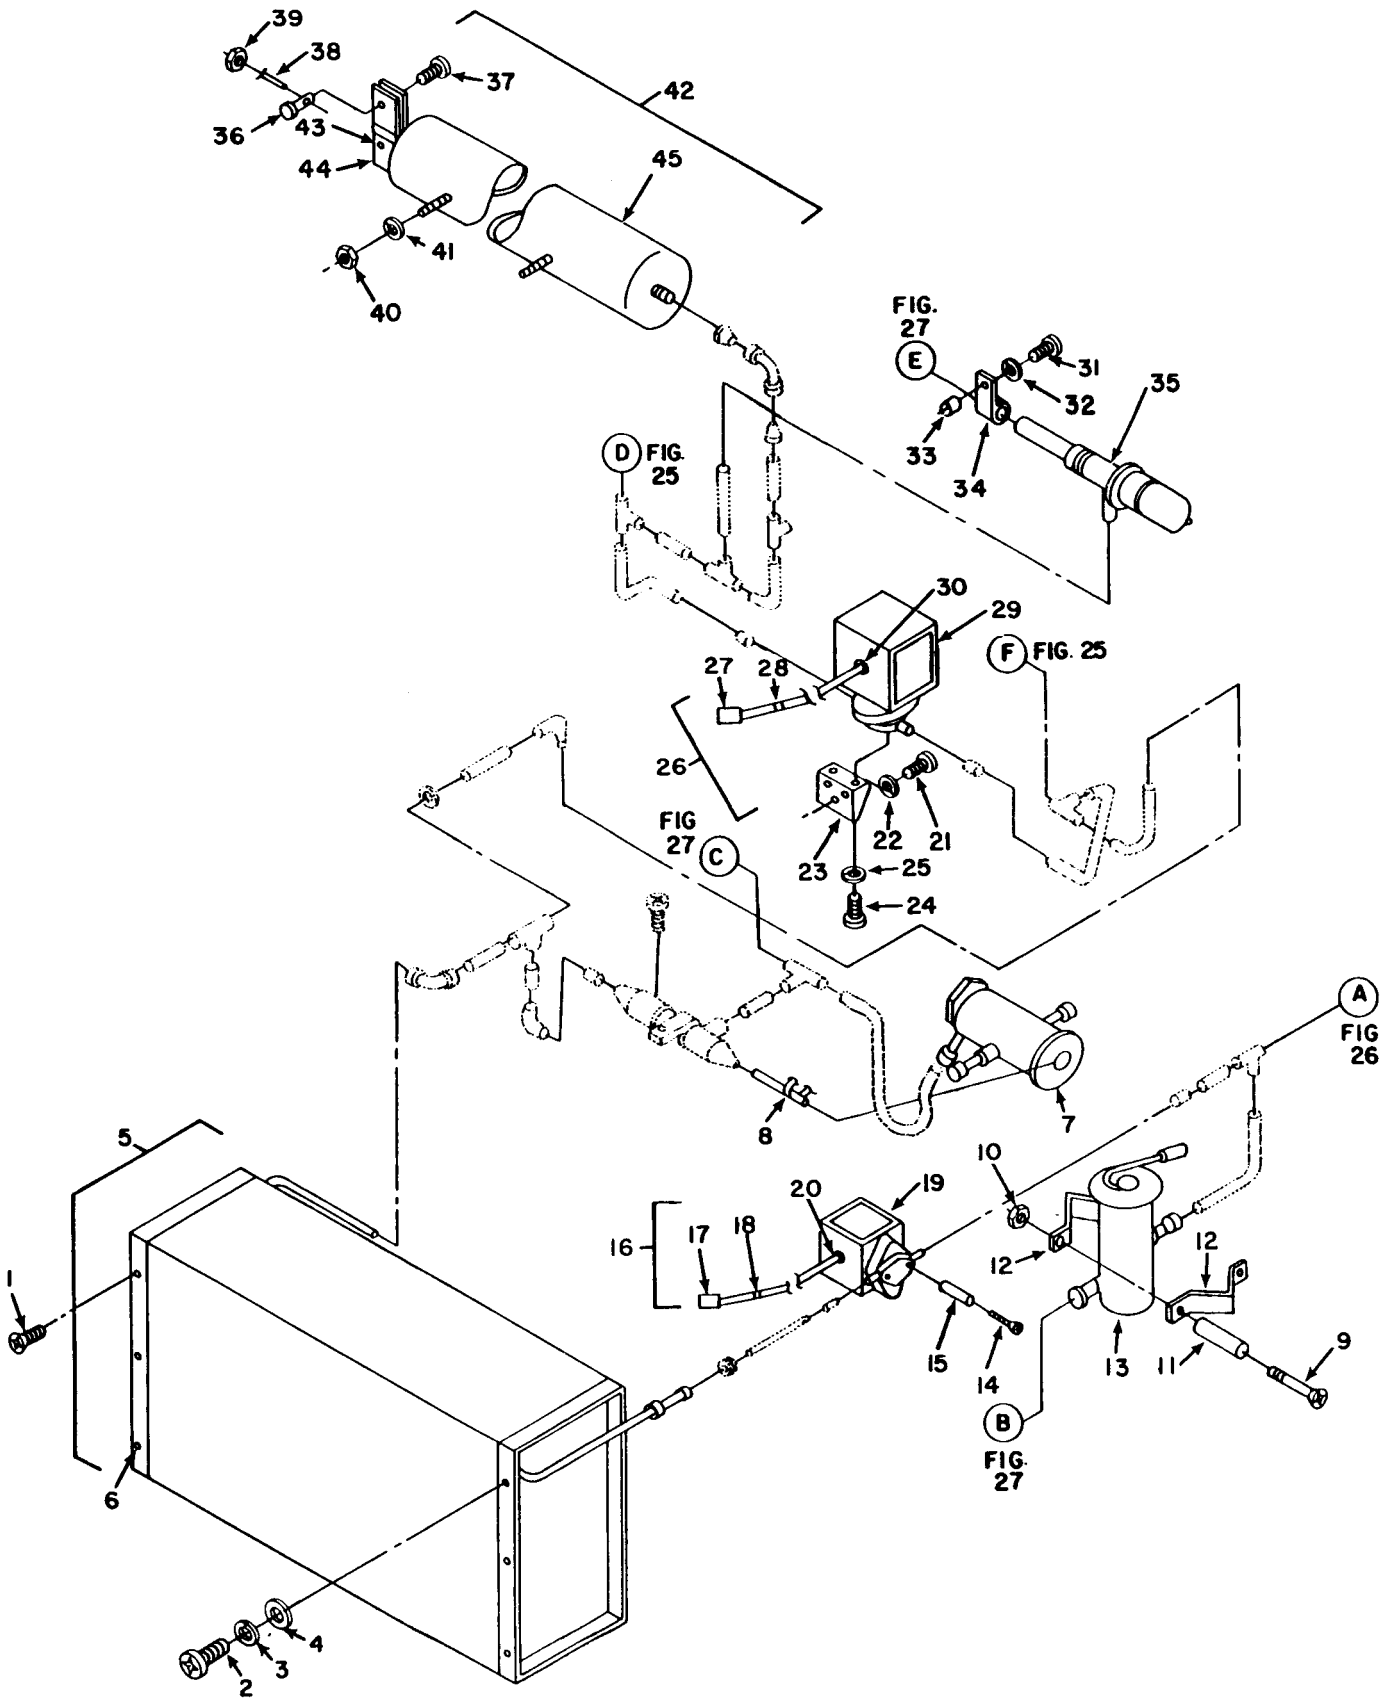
Evaporator Coil, Expansion Valves, Solenoid Valves, Pressure Regulator Valve and Actuating Cylinder
